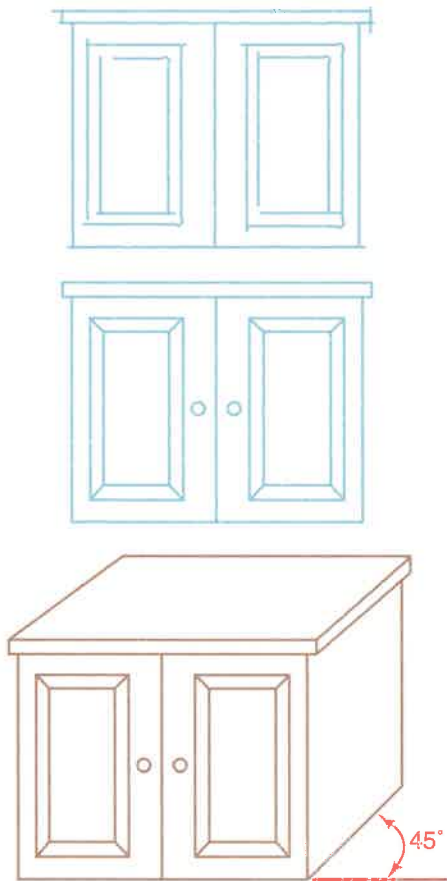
The steps in sketching a cabinet drawing. Top—Light outlines. Middle—Darken lines that accurately outline the object. Bottom—Lines are added to show depth.
